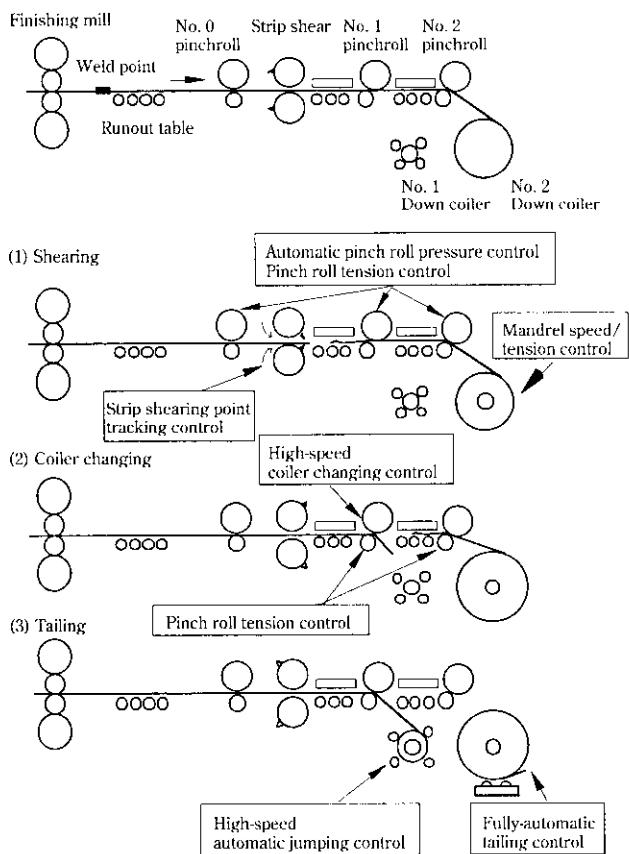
Process control of high-speed shear and coiler in endless hot strip rolling
